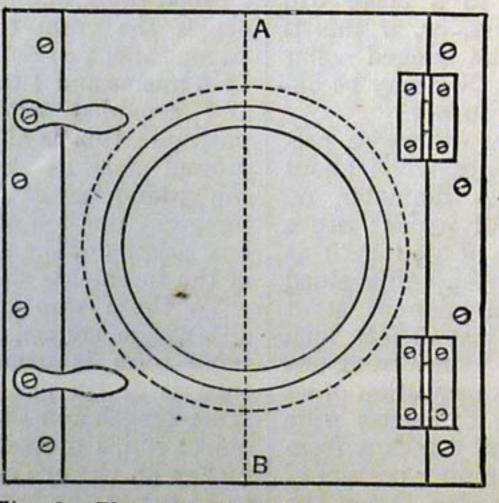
Flan of Object Box, with Glass Removed, showing Construction of Top (half full size).
